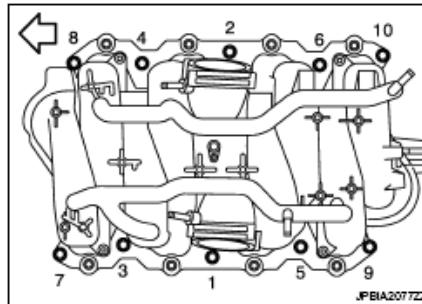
Identifying Intake Manifold Mounting Bolt Tightening Sequence
